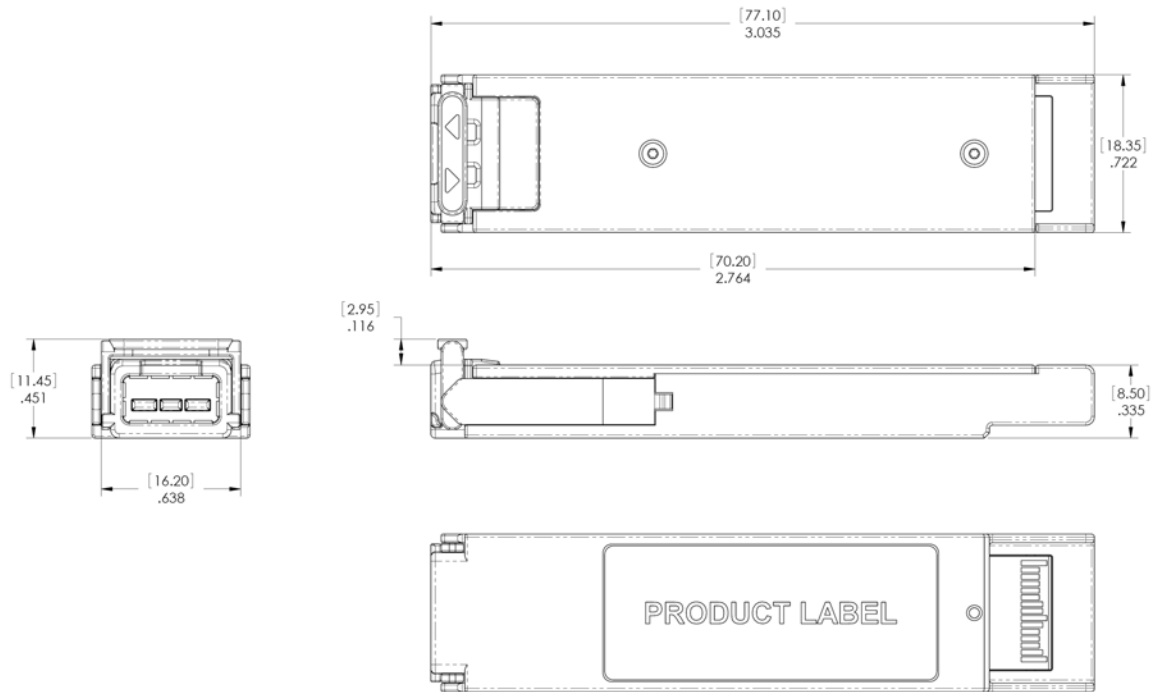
FTLX0011D4BNL Mechanical Dimensions.
